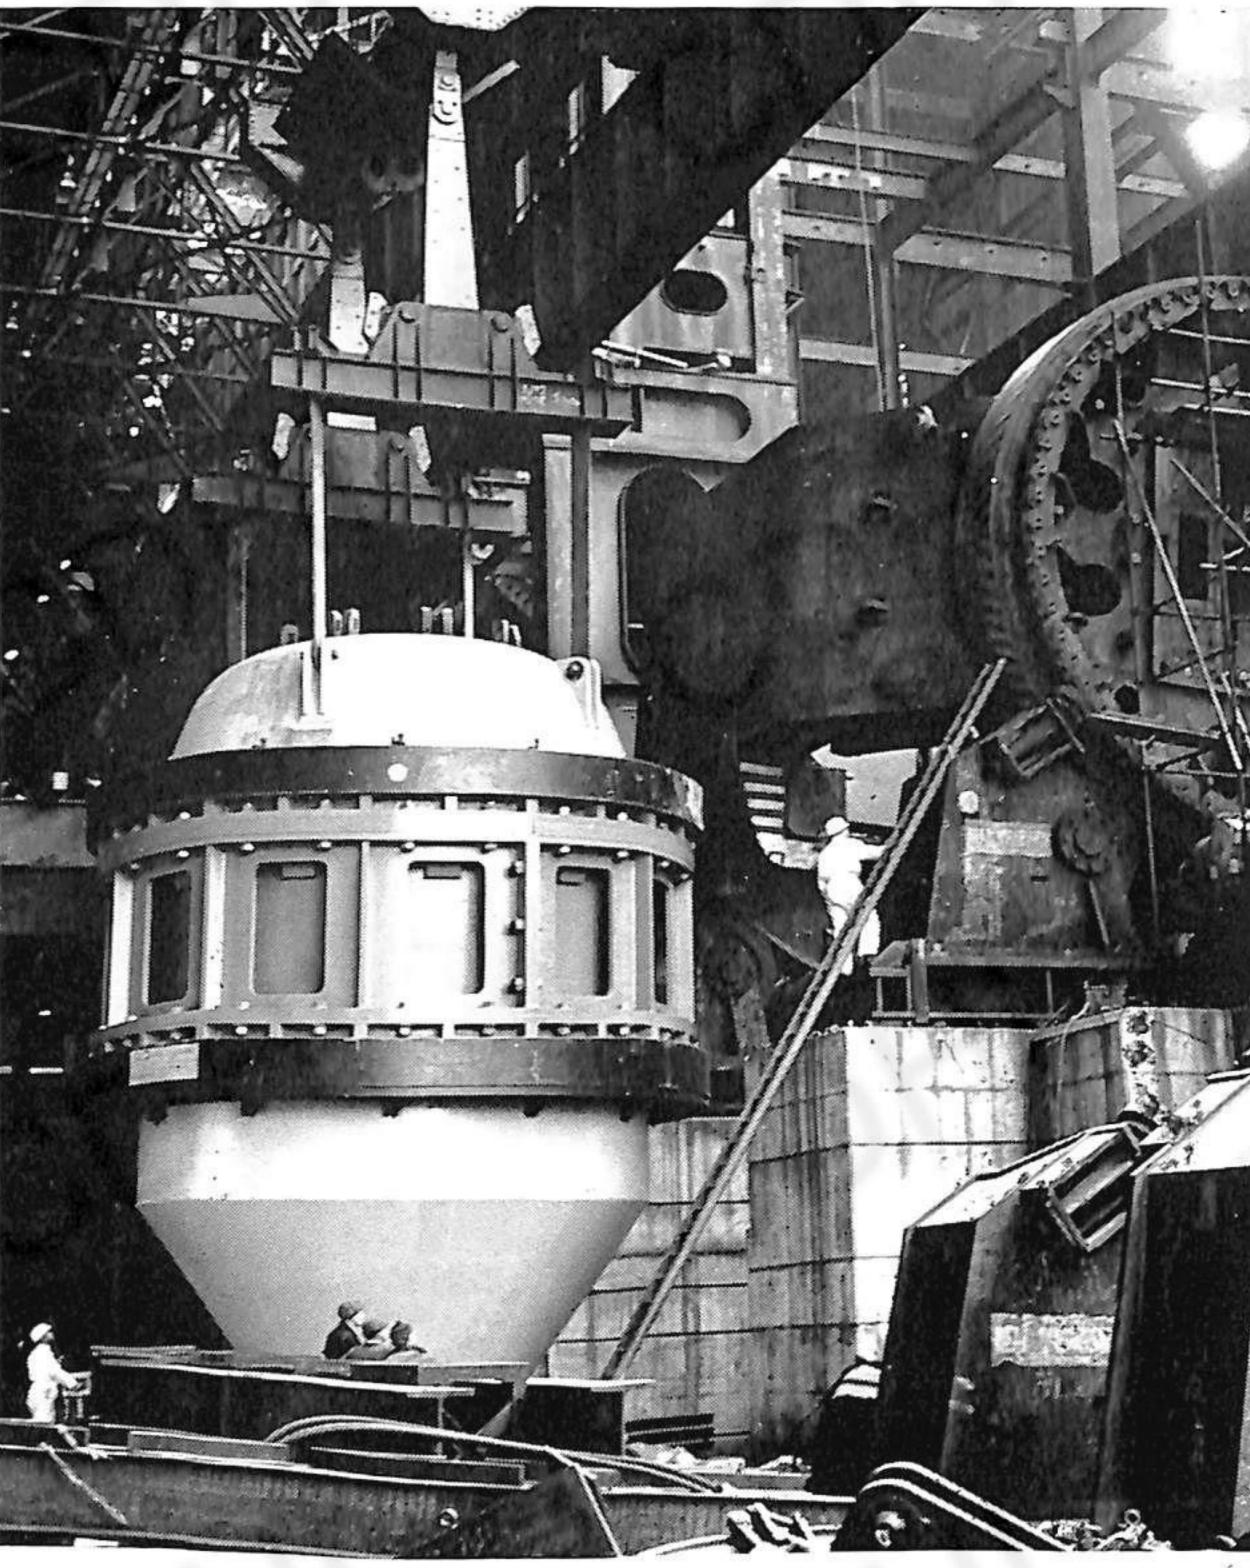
Preparing to insert the Kaldo vessel into the main frame assembly
